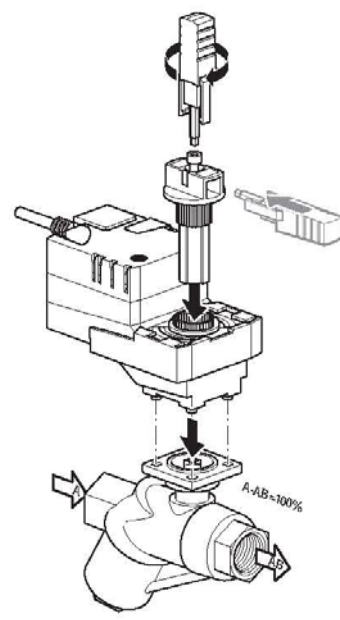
Installation of VA2104 Actuator on P1000 Valve
